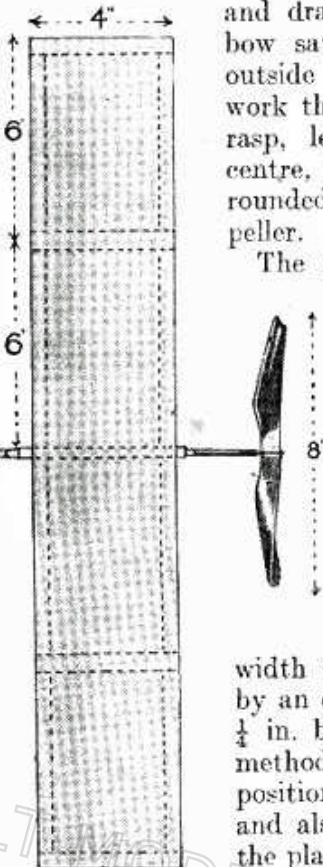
A piece of iron wire is bent round the propeller to act as a spindle.
